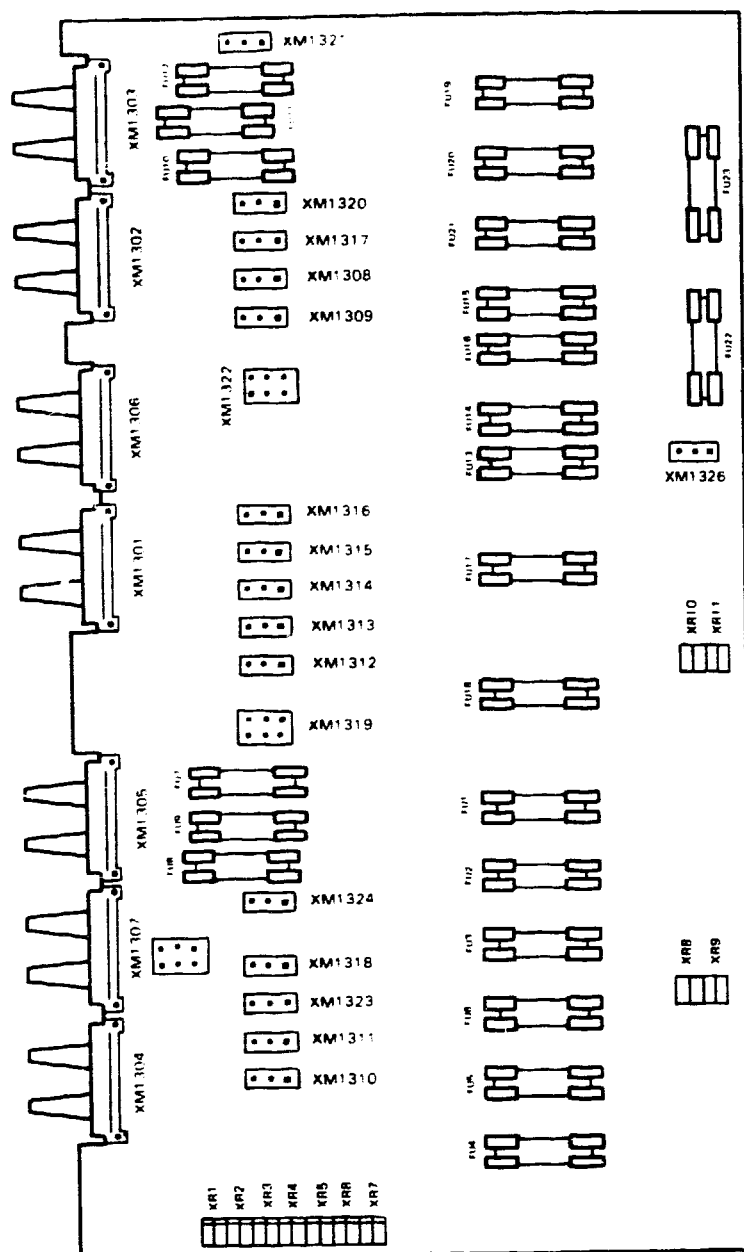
is an assembly drawing showing the location of the fuses and connectors on the FILO board.
